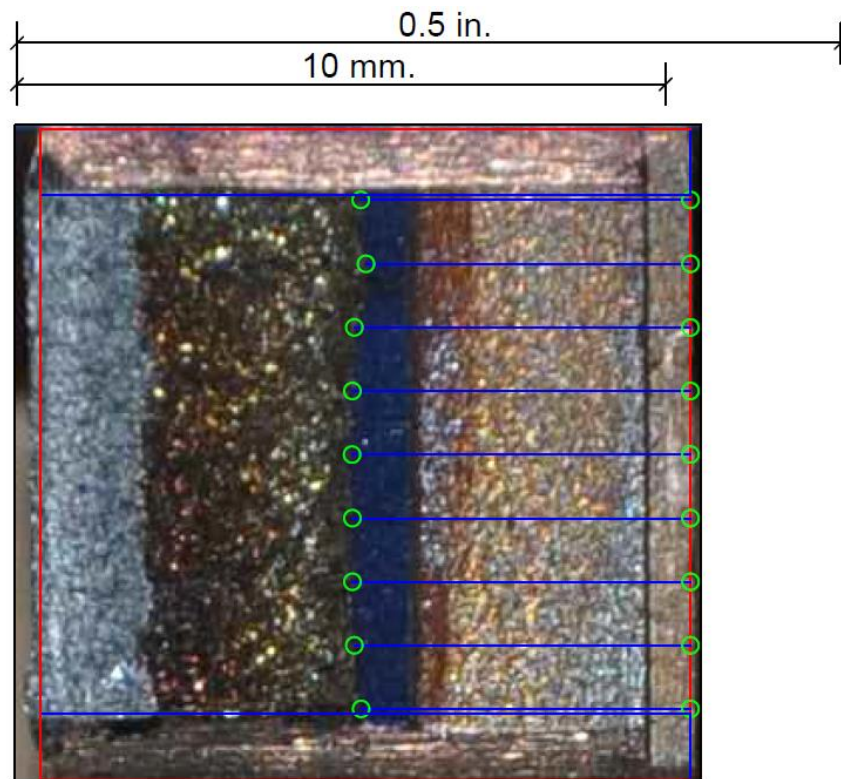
Specimen R17' Fracture Surface
